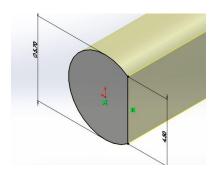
The dimensions of the D-profile of the Mark 2 drive shaft.
